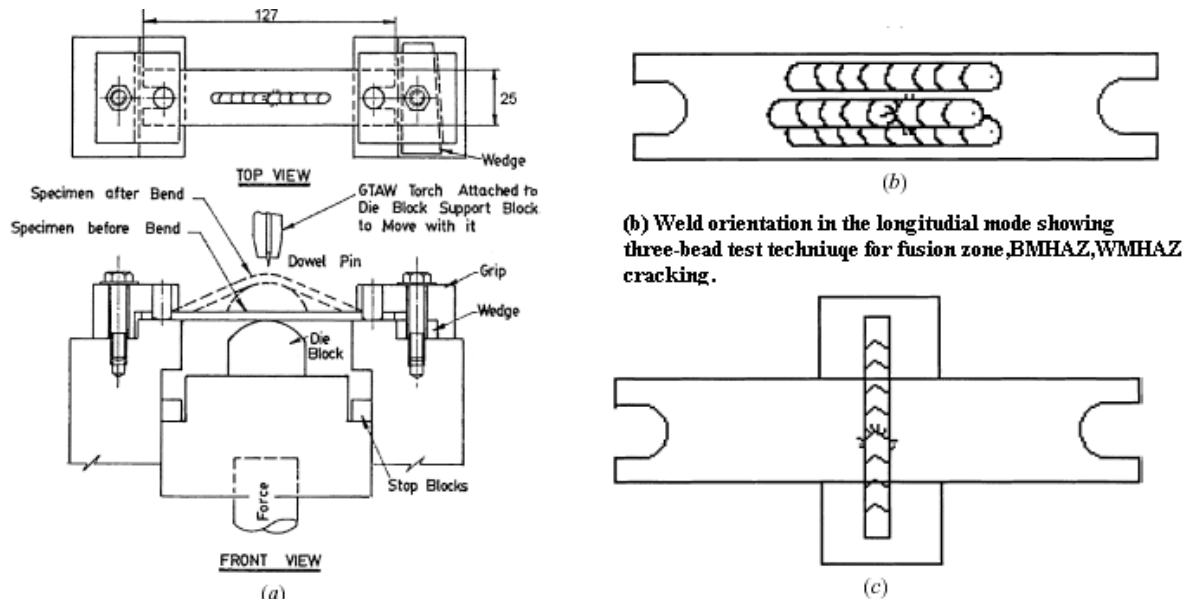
Schematic diagram of the Varesstraint test equipment for study of hot cracking during welding:
